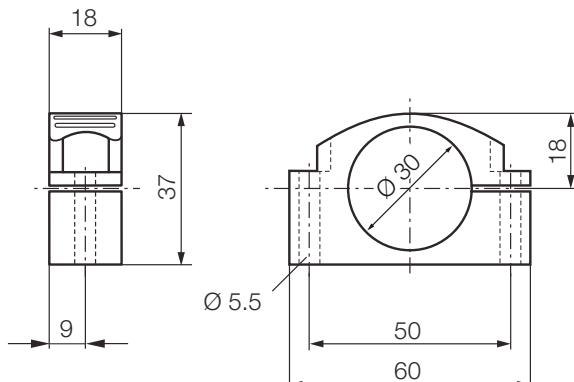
Mounting cuff BTL6-A-MF03-K-50
